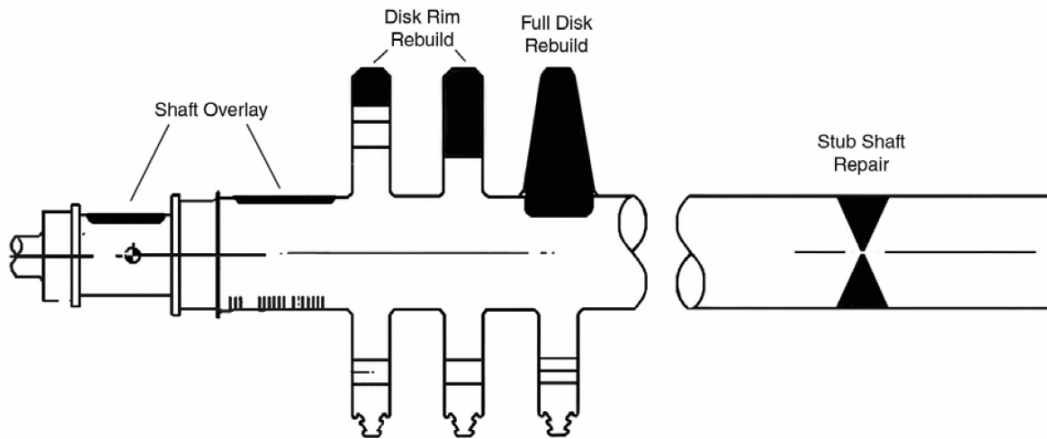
Examples of rotor repairs. The stub shaft repair is an example of a groove weld [10].
